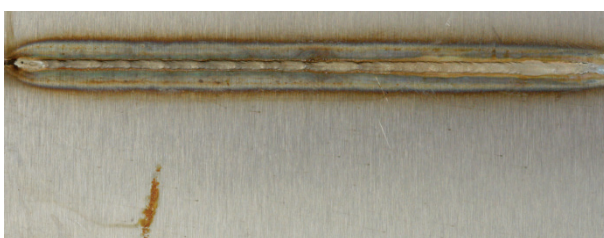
Corrosion attack of sample N1 (weld root)
